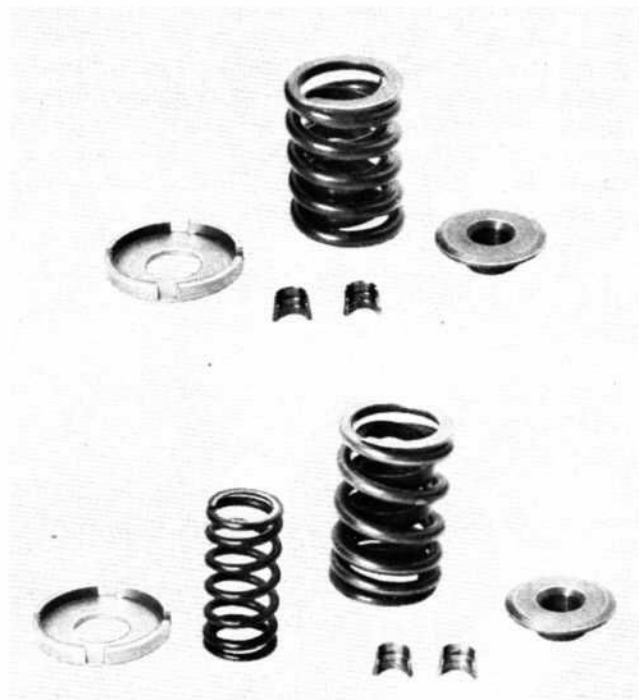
Valve spring setups for Boss 302, Stock spring on top, Super Spring Assembly (DOZX 6A511-A) on bottom.
